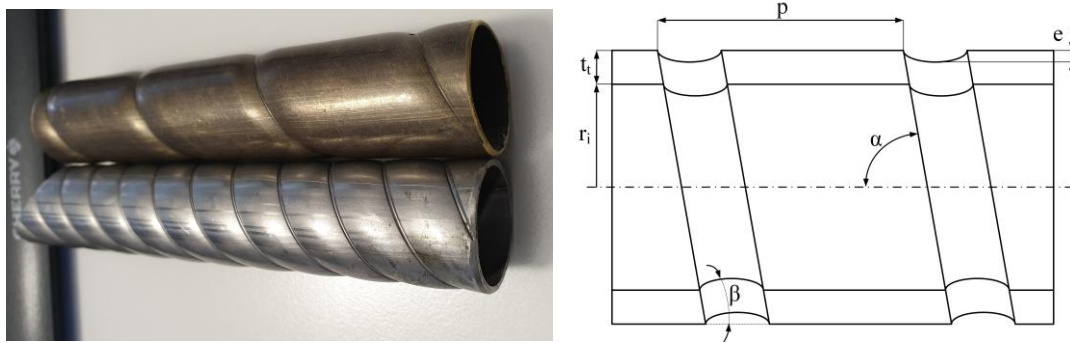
Left: Exemplary spirally grooved tubes with one thread (top) and three threads (bottom); Right: Geometry definition of spirally grooved tube
